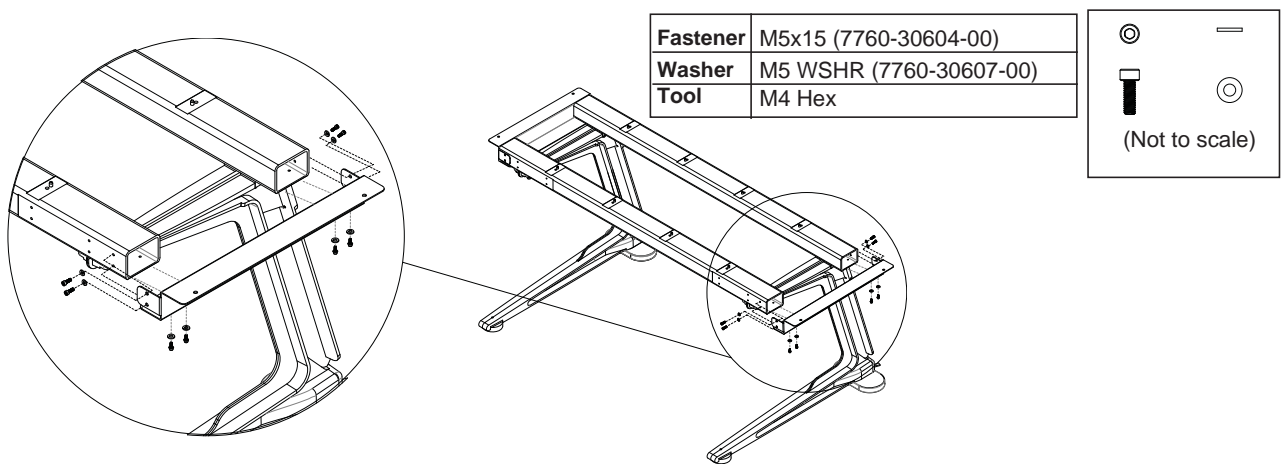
Removing the right side End Bracket (left side End Bracket shown attached)
